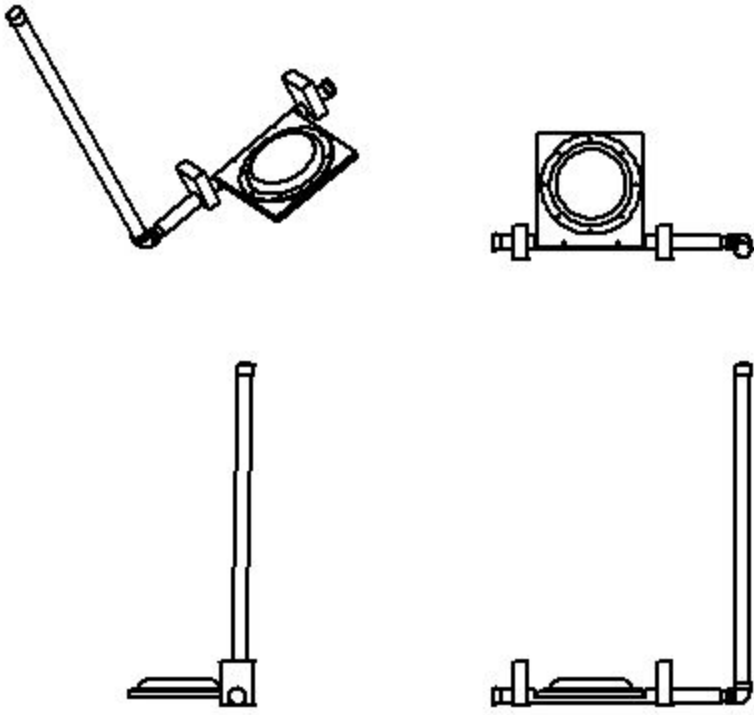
Mechanism assembly drawing. From left to right, top to bottom: iso, top, left, back.
